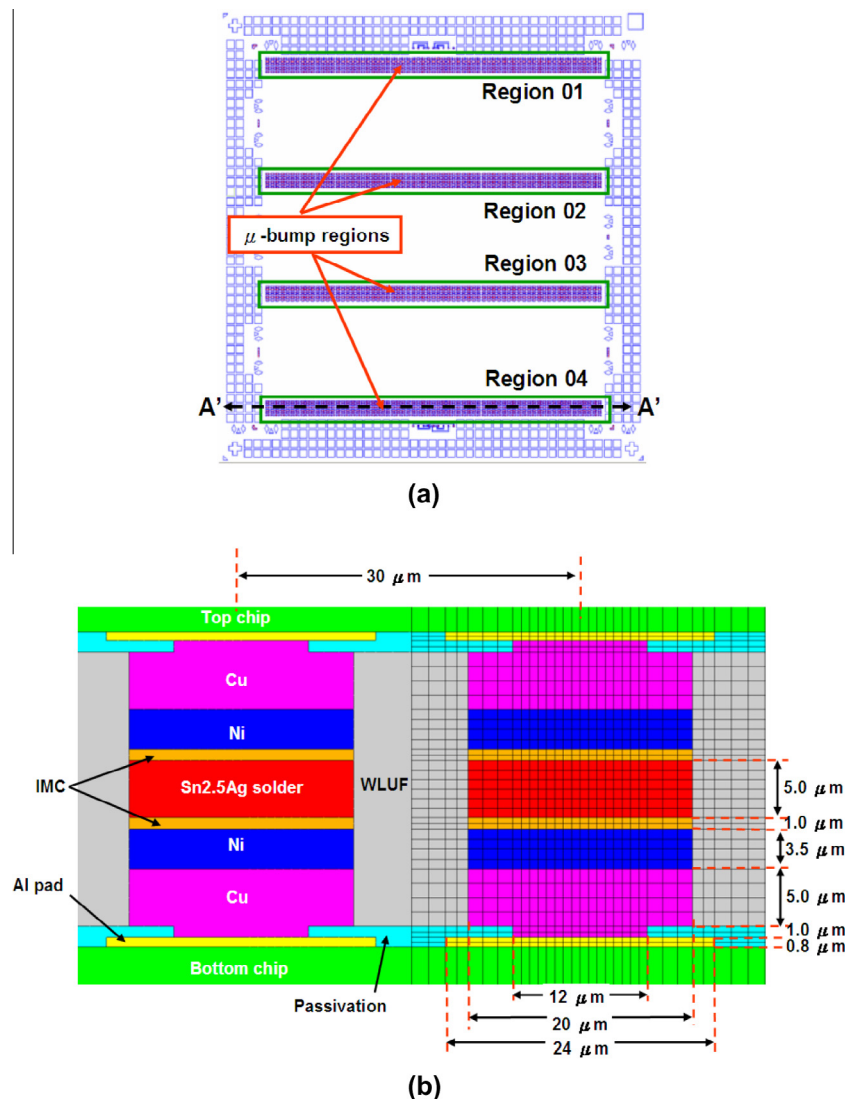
Schematic of the packaging framework: (a) layout of microbump regions in chip-on-chip packaging; (b) cross-sectional view and related dimensions of microbump arrays.
